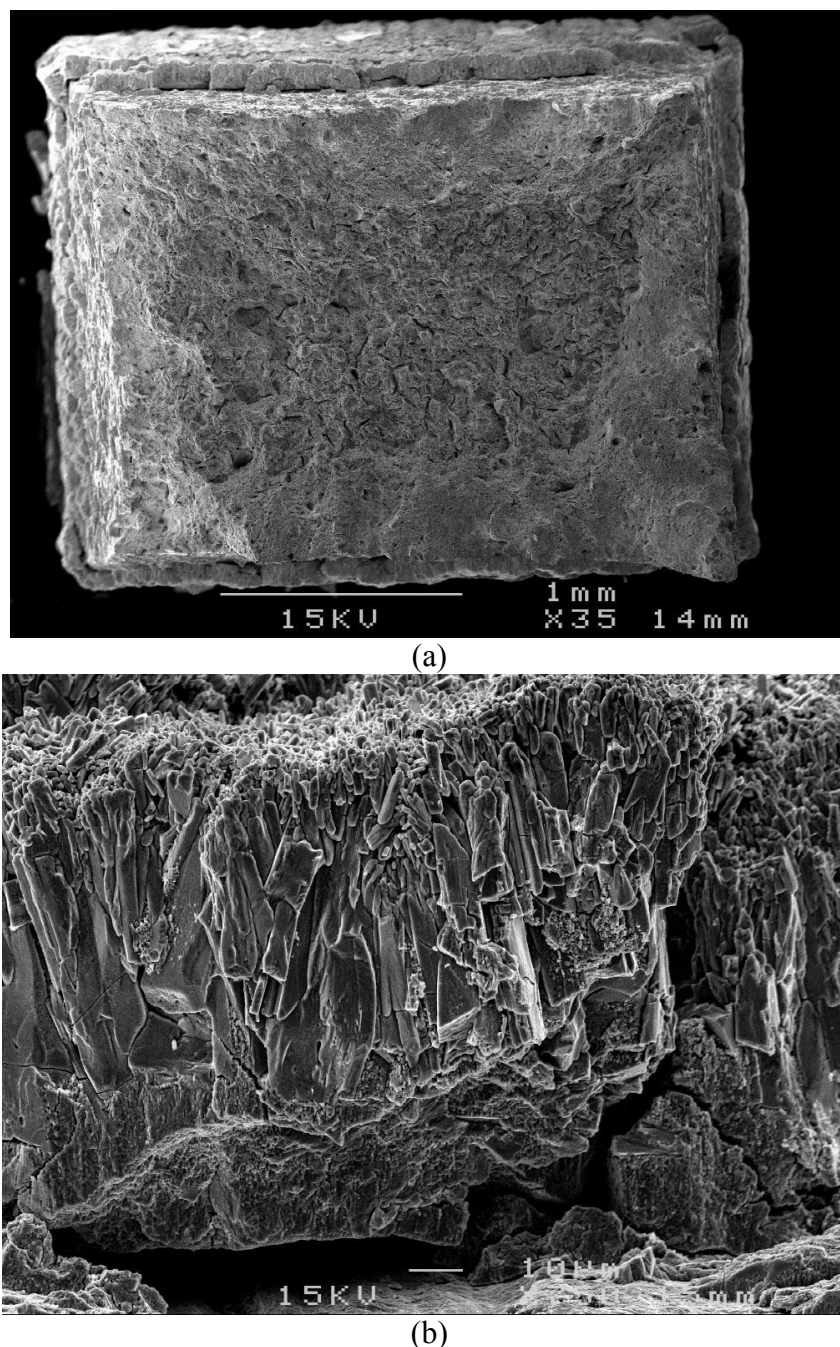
Fracture surface of galvanised sample after LIST test
